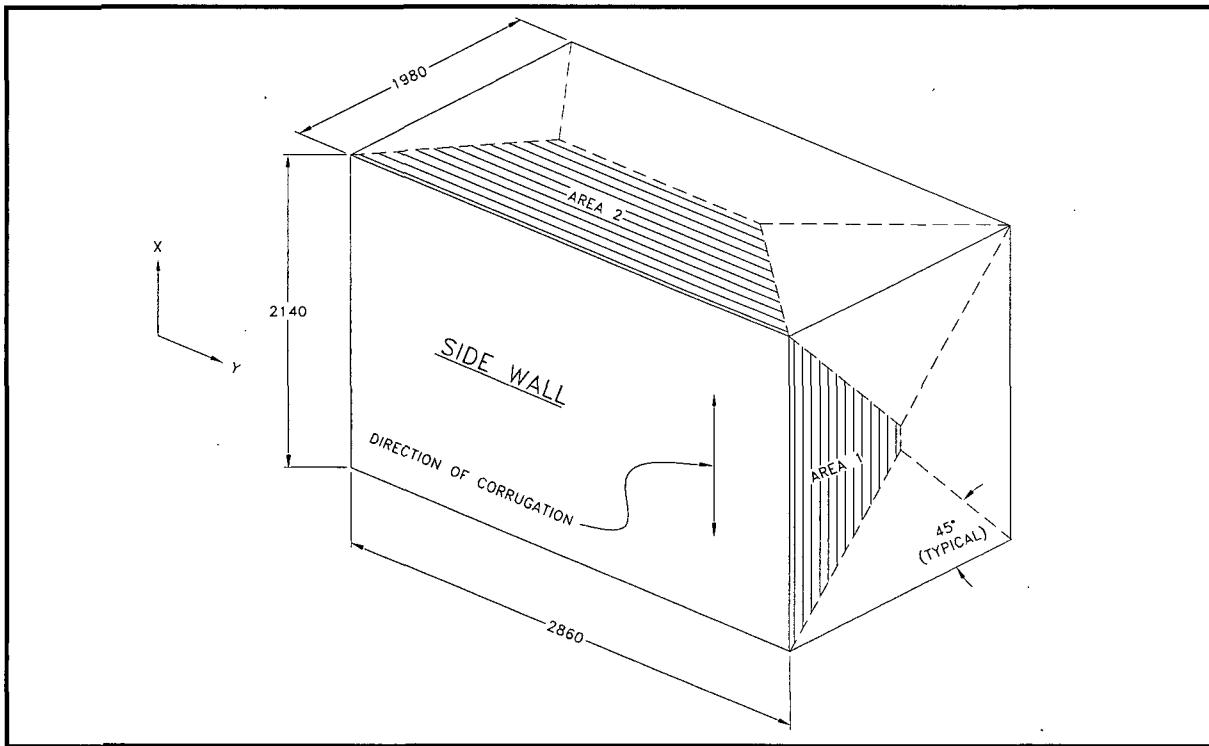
(a) – View of Side Walls and Adjacent Walls, Showing Areas Used to Calculate Edge Loads for Side Walls
